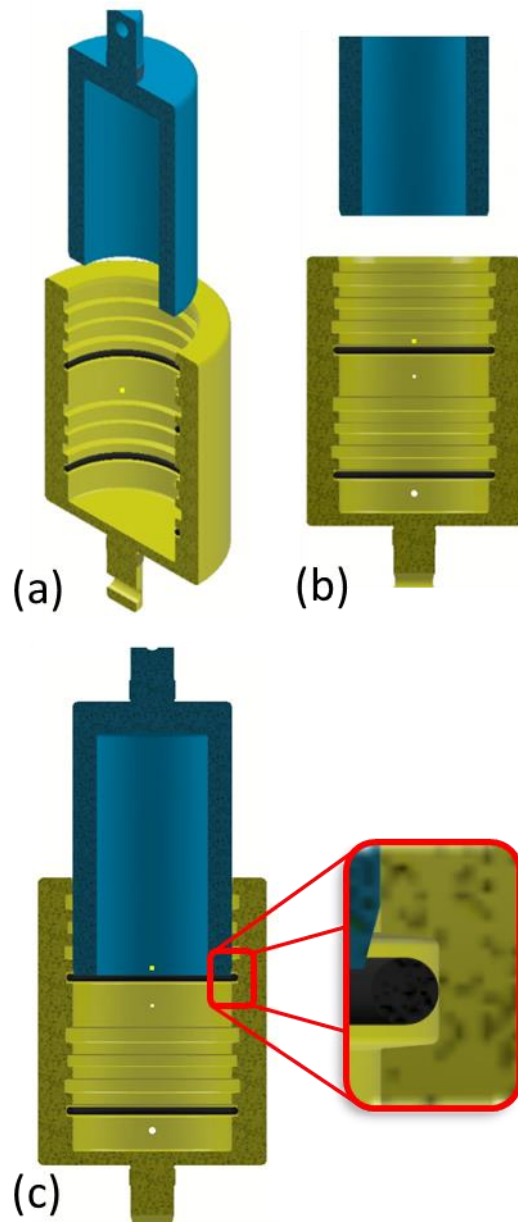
a 3D modelling of the friction rig. (a) a half cut 3D view of the piston (blue) and sleeve (yellow) with the O-rings (black) installed. (b) 2D front view before the engagement of the piston. (c) 2D front view of the piston engaging with the O-ring, zoomed in on the gland. The gland will be used for FEA to determine normal forces.
